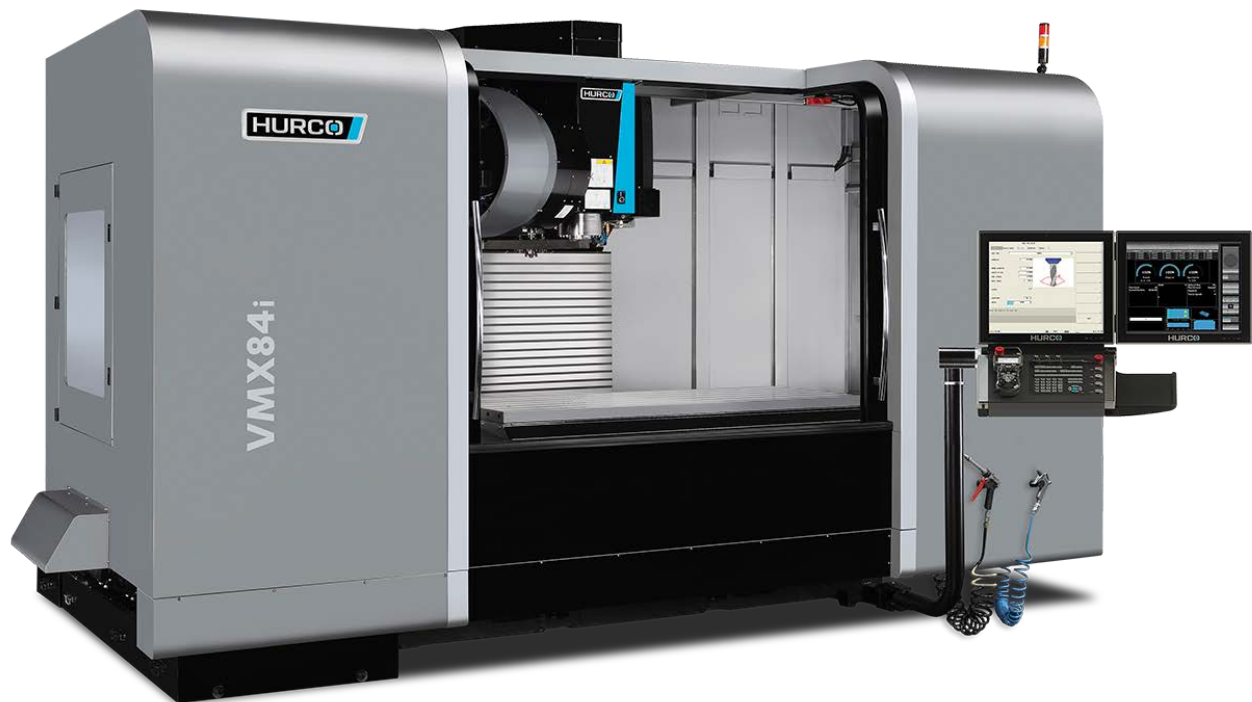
Hurco VMX84i-50t. Weight 16,700 kg (36,806 lbs). Travel 213 cm X 86 cm X 76 cm (84x34x30 inches). Table size 218 cm X 86 cm (86x34 inches). This machine comes close to what is needed on the Moon to make parts for heavy equipment [30]. Image used with permission from Hurco Inc.
